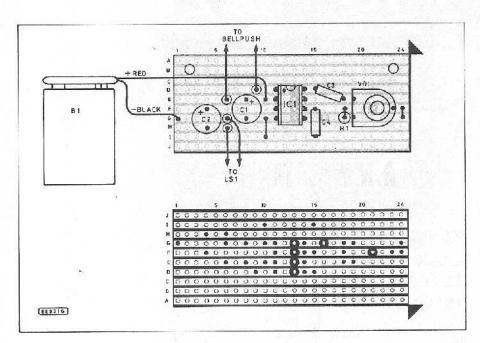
Circuit board component layout, details of breaks to be made in the underside copper tracks and wiring details to the speaker LS1 and belipush S1. An i.c. holder should be used to mount IC1 on the board.
